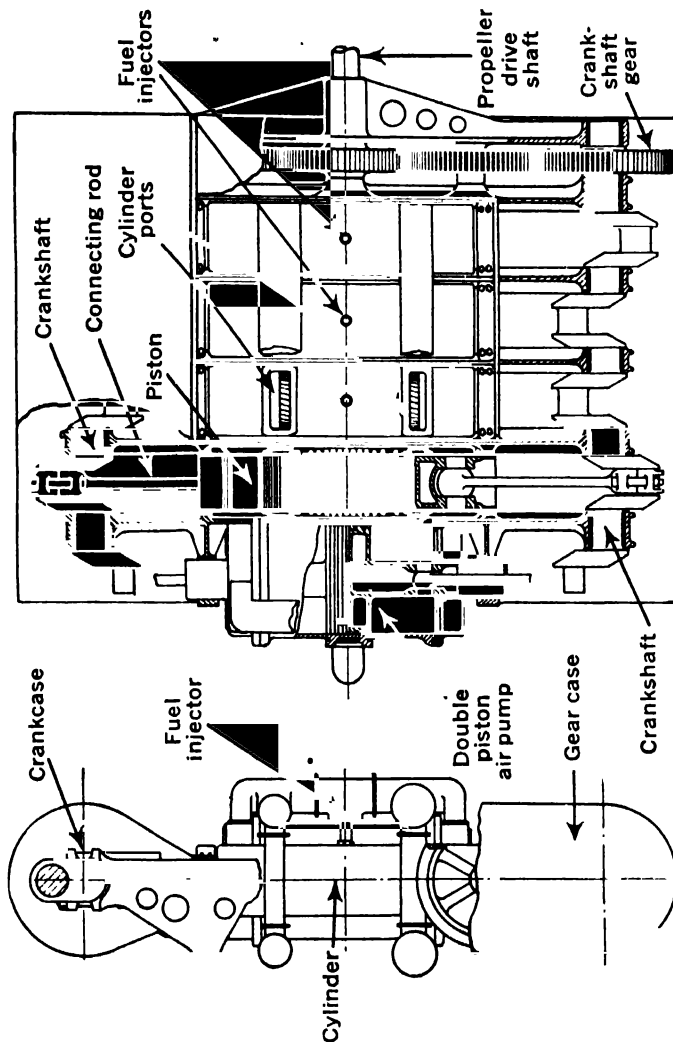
Diag Showing General Construction of Junkers Diesel Engine Experimented with
